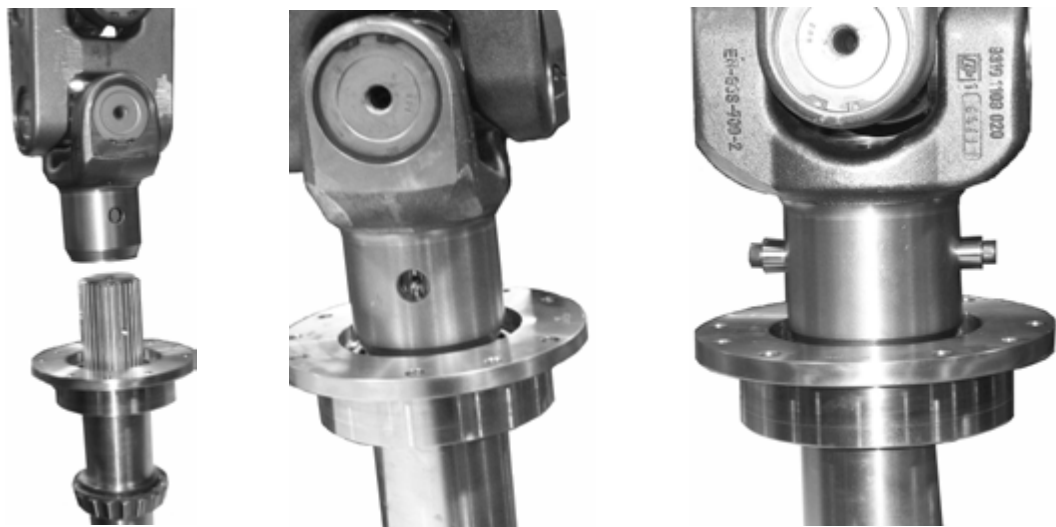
Lower U-joint Onto Spline (left), Align the Hole with the Threads (center), and Install Collars (right)
